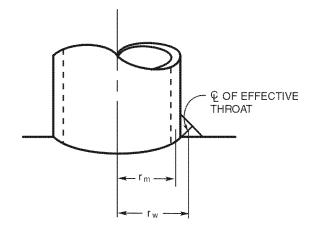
Tubular T-, Y-, and K-Connection Fillet Weld Footprint Radius (see 2.39.3)
